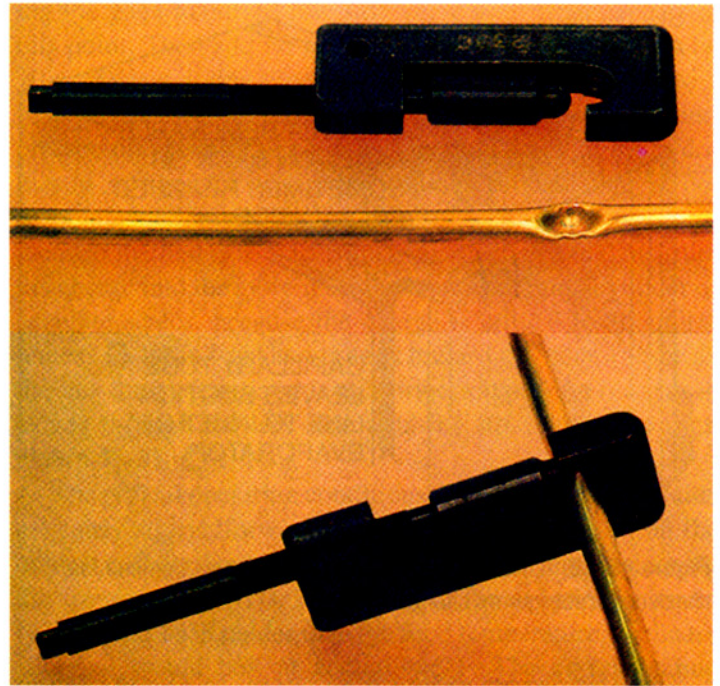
A special pinch-off tool. Photo by Bill Johnson
